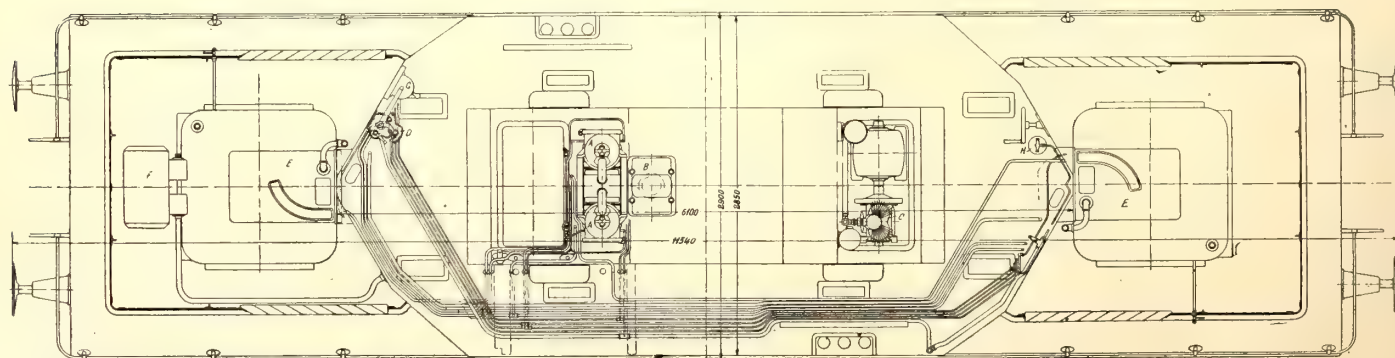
FLOOR PLAN OF LOCOMOTIVE, SHOWING ARRANGEMENT OF APPARATUS
